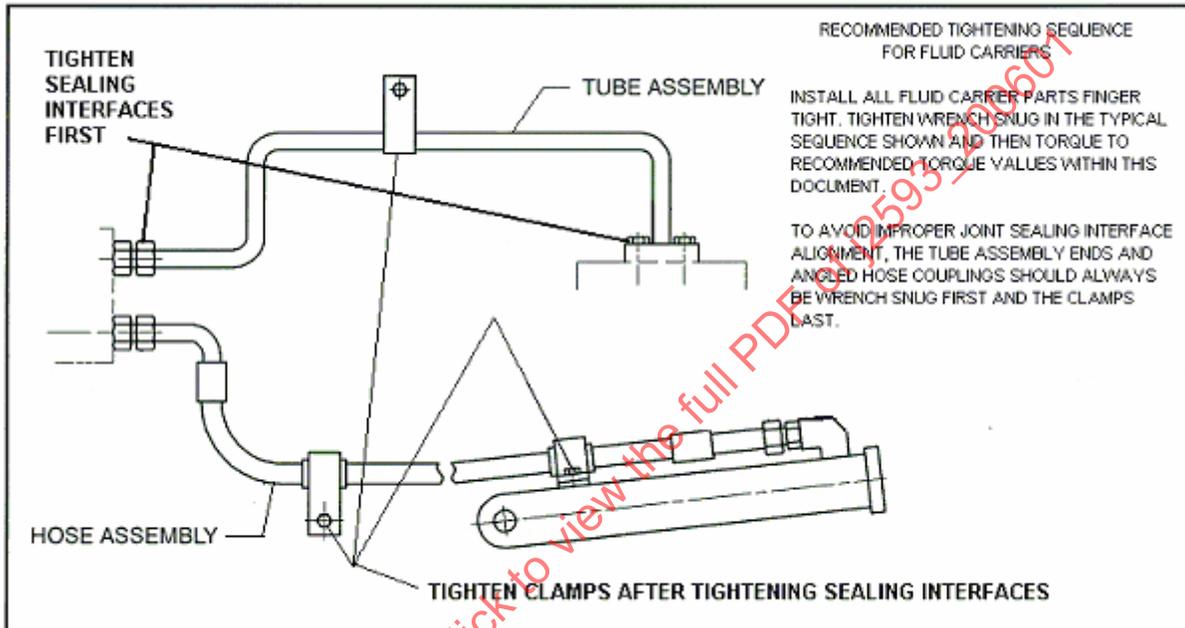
TYPICAL HYDRAULIC FLUID CONDUCTOR AND CONNECTOR INSTALLATION
